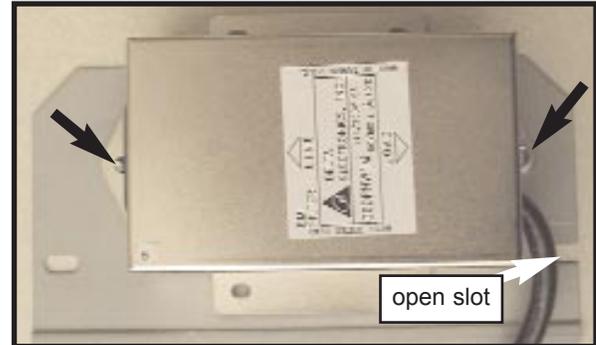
In-line power filter secured to mounting bracket with two hex nuts (550).
